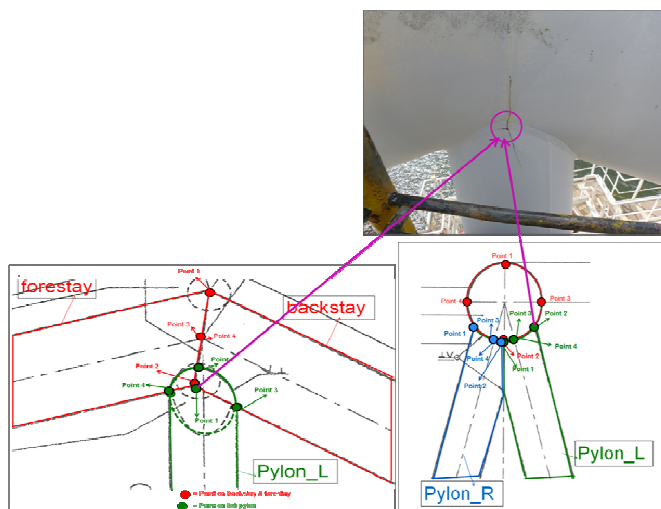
Cracks at tubular weld on upper arm Skyline 25t lemniscate crane (Maja 2017)
